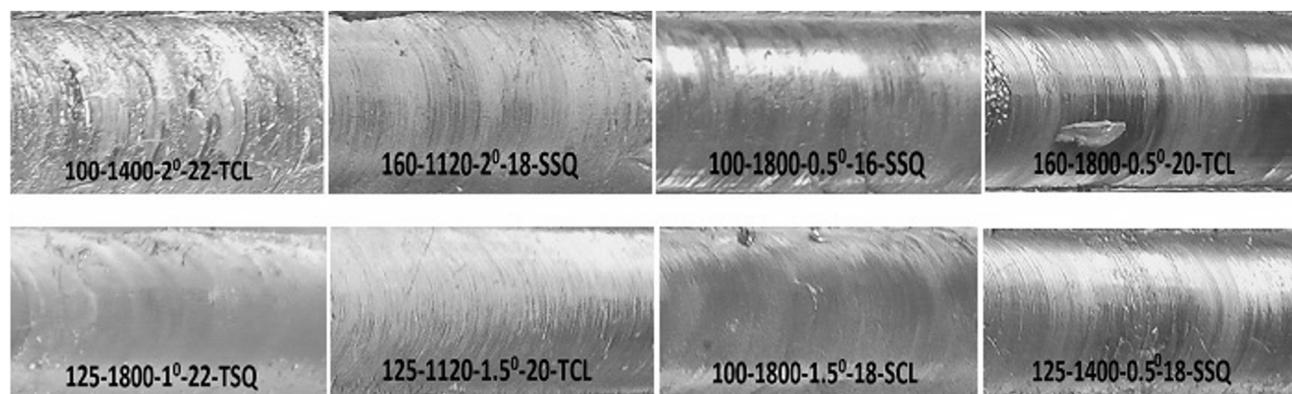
Macrographs of weld beads obtained from the experimentation [TS–RS–TA–SD–TPP]
